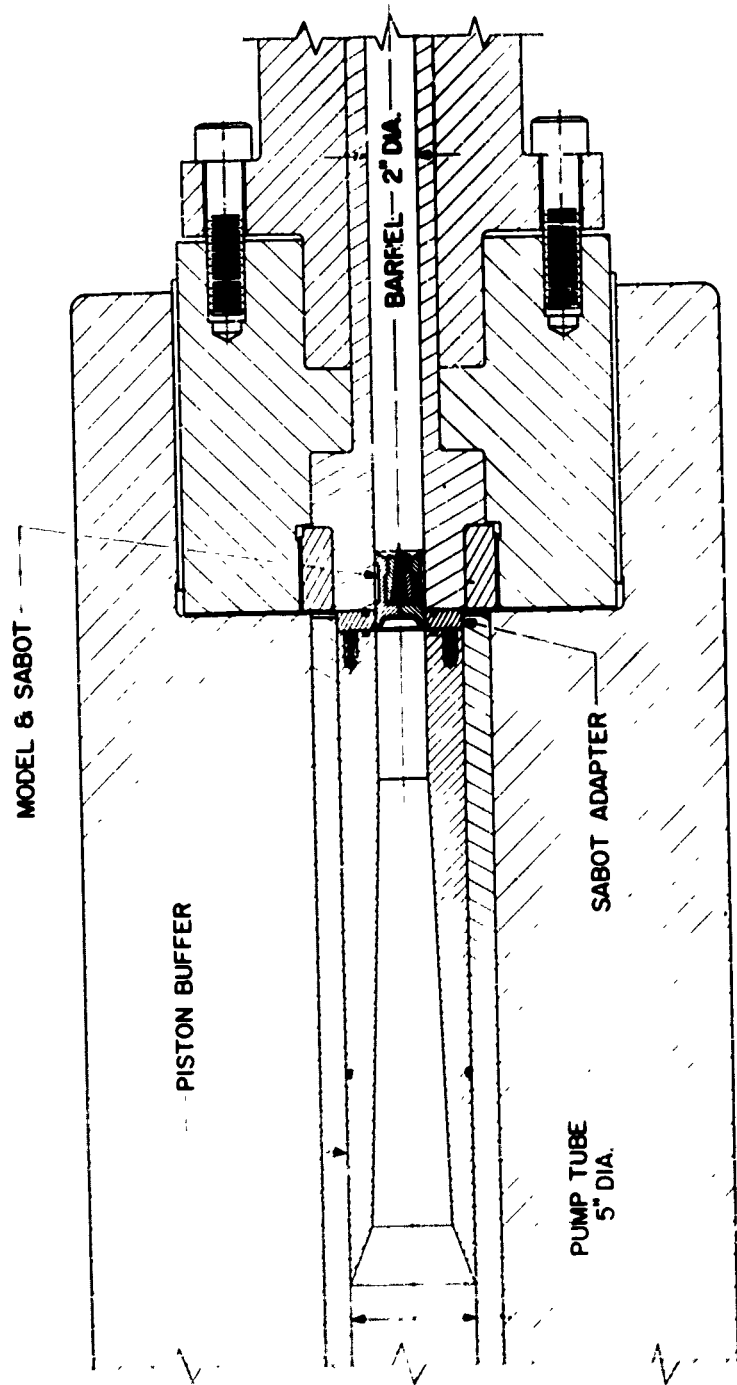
PUMP TUBE - BARREL ASSEMBLY
